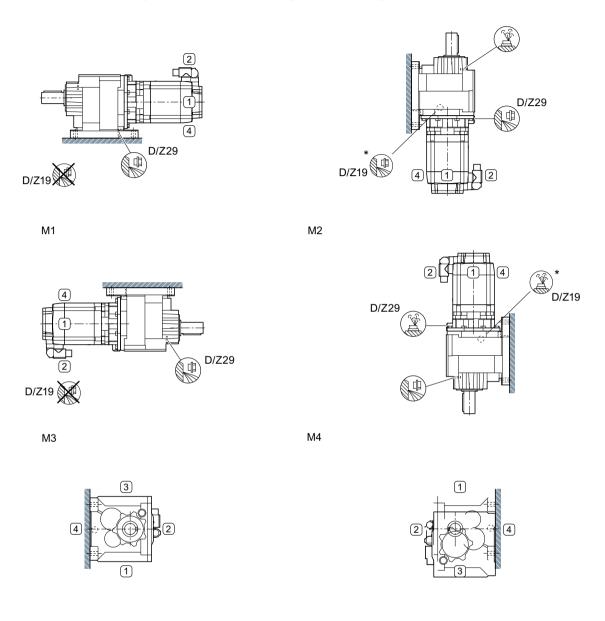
Mounting positions for servo helical geared motors Z and D, foot-mounted design, frame sizes 19 - 29, 2 stage and 3 stage
